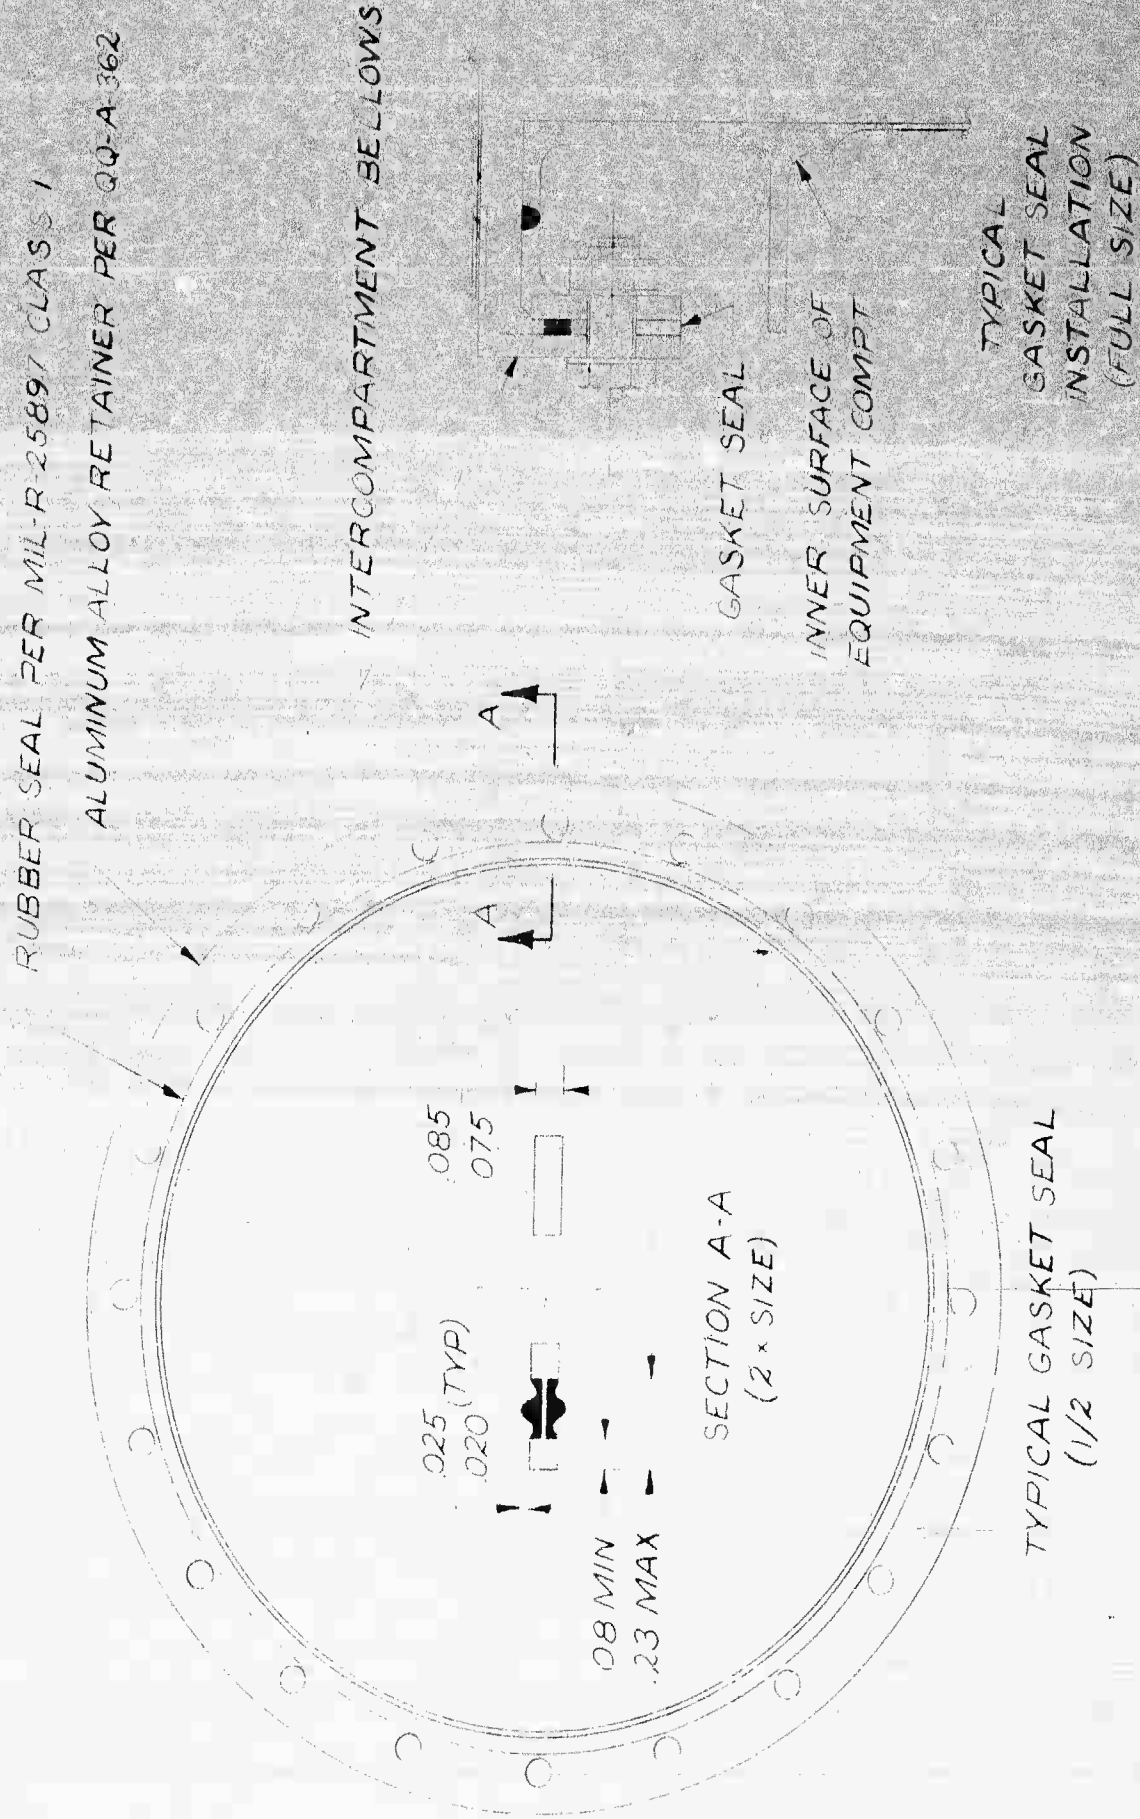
GASKET SEAL DETAIL AND INSTALLATION
